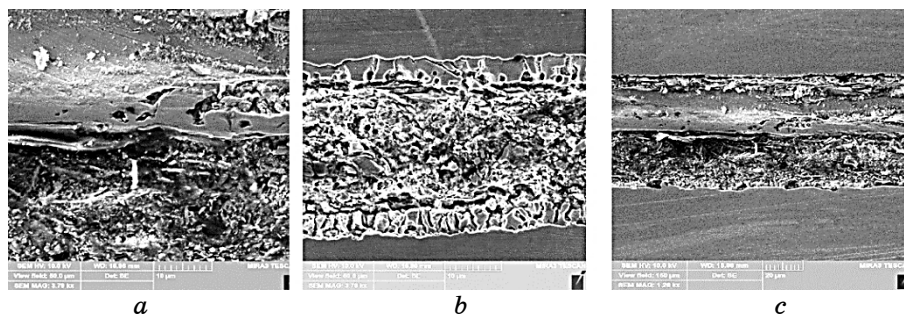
The structure of the welded joint after argon-arc spot welding by modes: joint 1 (*a*), joint 5 (*b*), joint 8. $\times 100$ (*c*).
